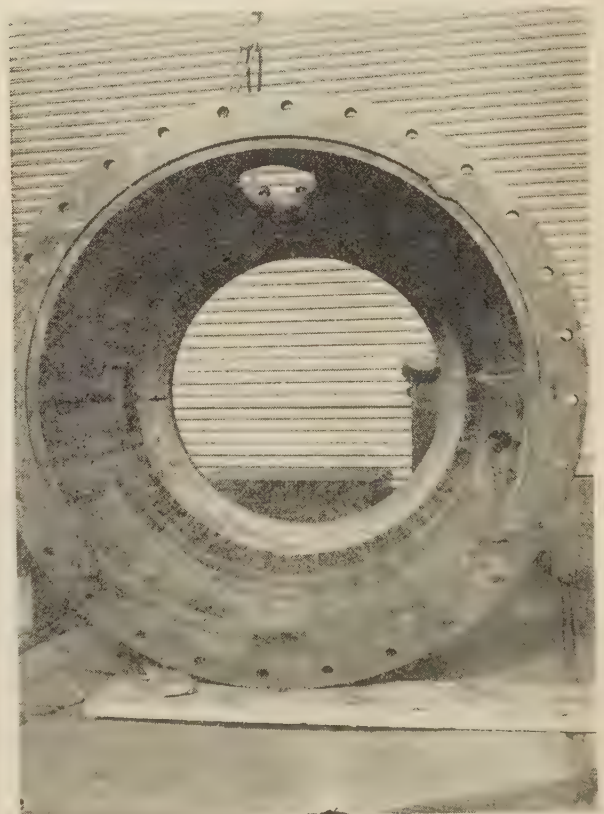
PITTED BODY OF RELIEF VALVE OF 40,000-HP FRANCIS TURBINE
